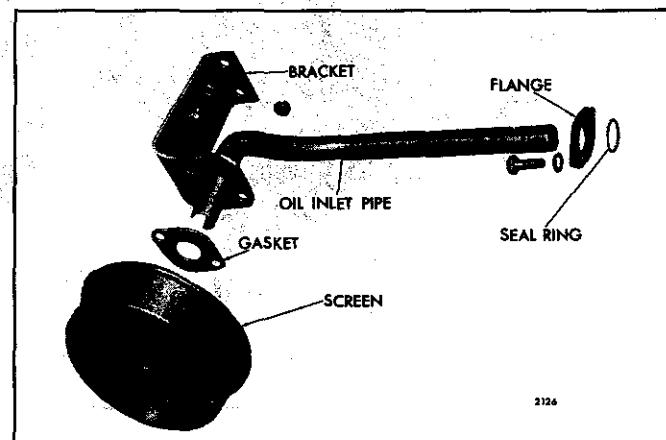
Oil Pump Inlet Pipe and Screen Details and Relative Location of Parts (In-Line Engine)
